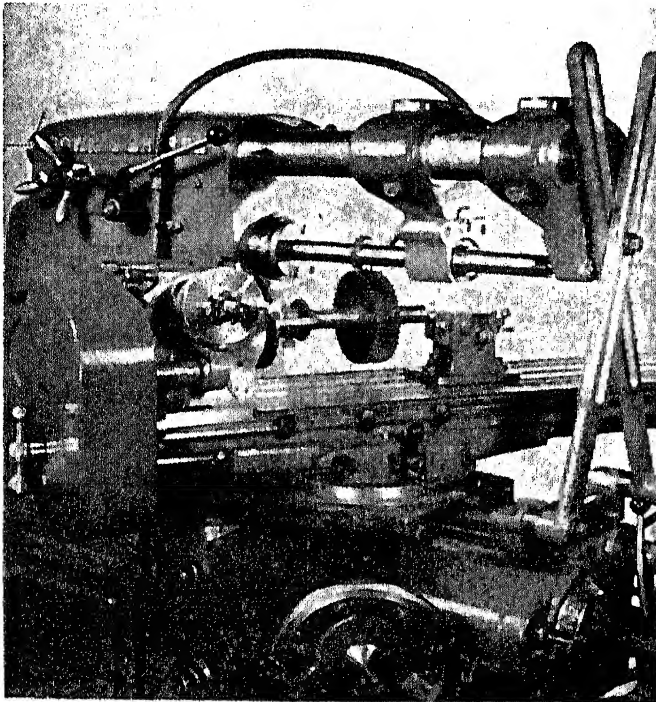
A No. 2 universal knee and column type milling machine with a dividing head and helical milling attachment set up for cutting a helical gear. (Courtesy Brown and Sharpe Mfg. Co.)
